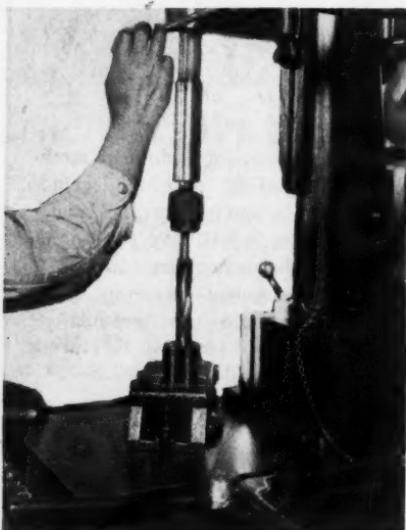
Overloading the chuck by using a large drill with a turned-down shank has the same damaging effect on the jaws that is produced when a wrench is used on the key.
